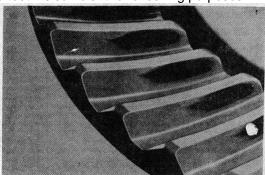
SATISFACTORY TOOTH CONTACT (GEARS UNLOADED)
